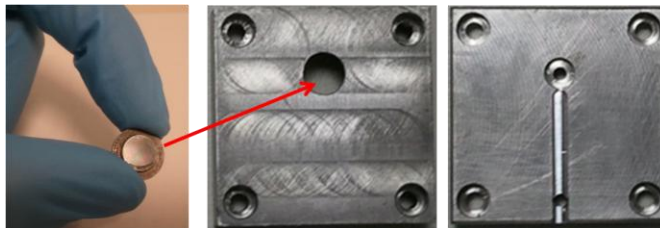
Micro structured stamp and final insert that has to be mounted in the micro injection moulding machine
